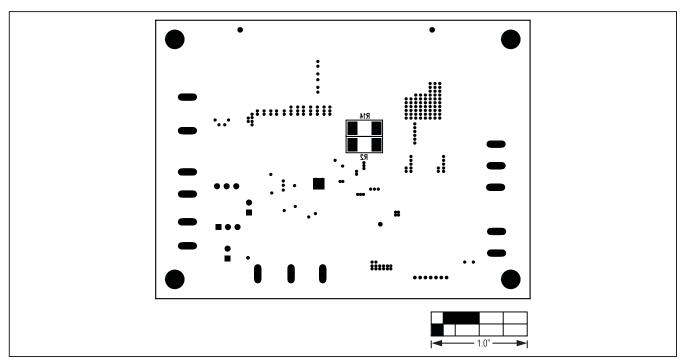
MAX16833 EV Kit Component Placement Guide—Solder Side
